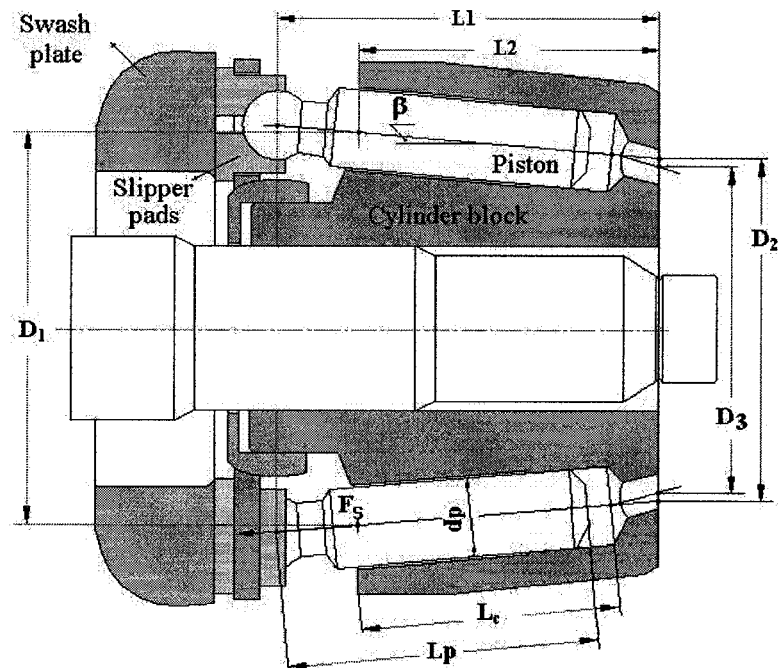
Sectional view and essential dimensions of swash plate axial piston pump with conical cylinder block [20]
